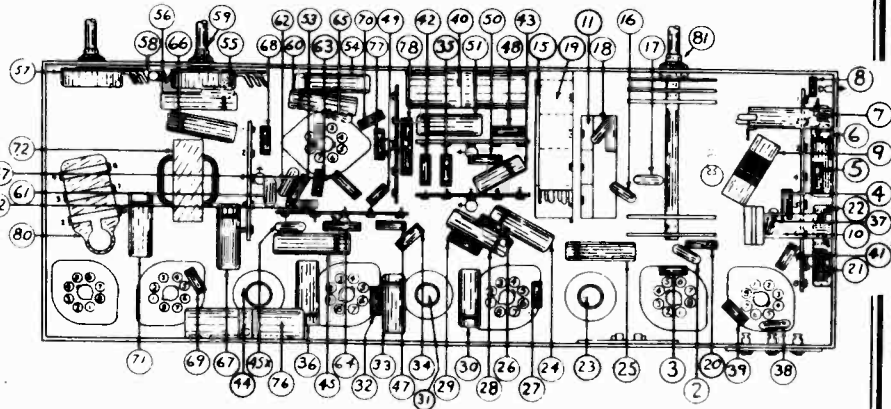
LOCATIONS OF PARTS—UNDER CHASSIS
